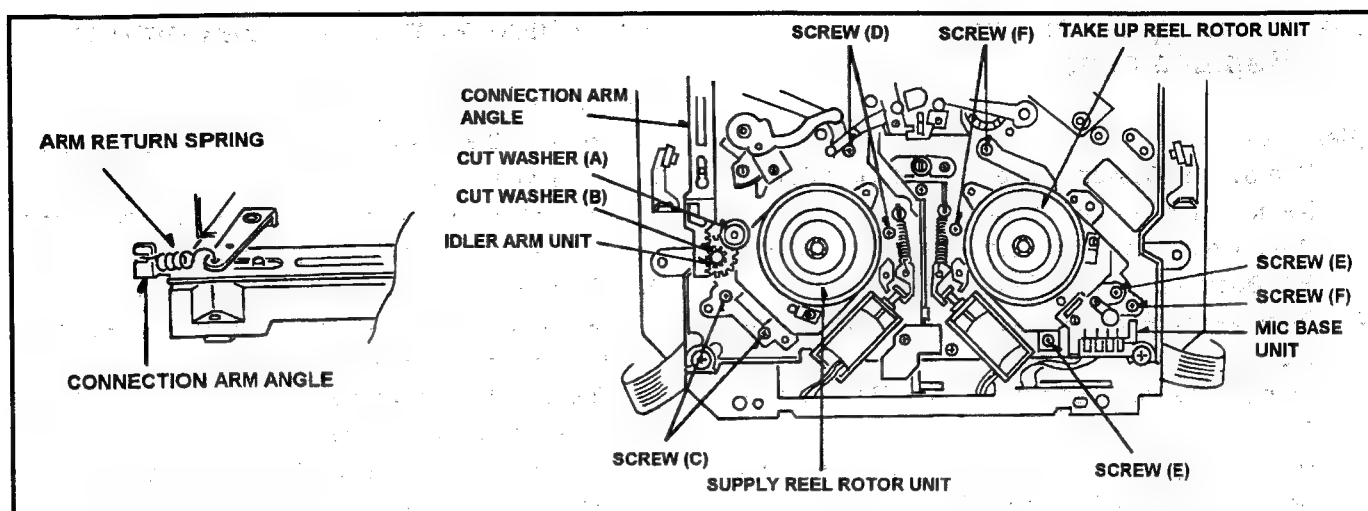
Removal of Supply & Take Reel Rotor Unit
